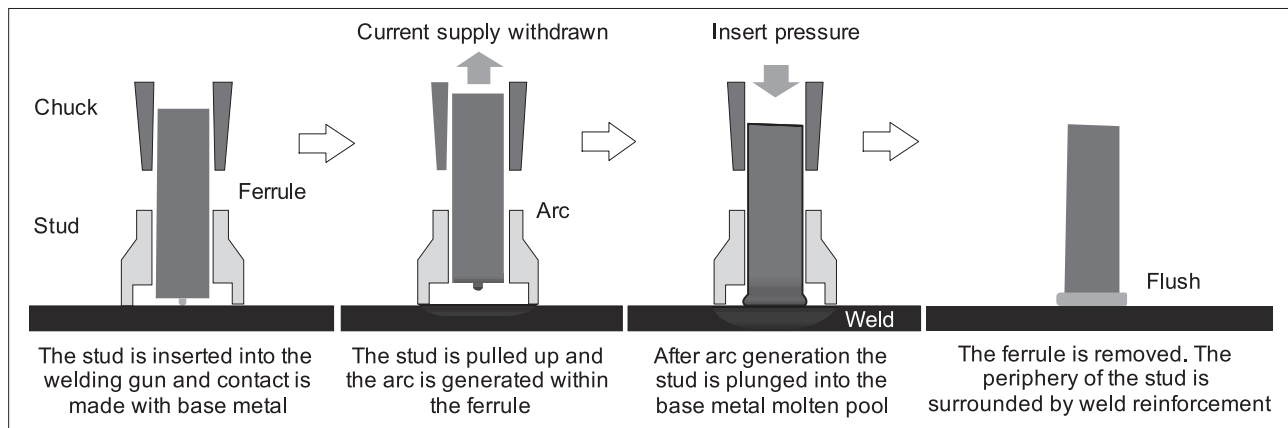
Welding operation sequence for stud arc welding with ceramic ferrule [8]
